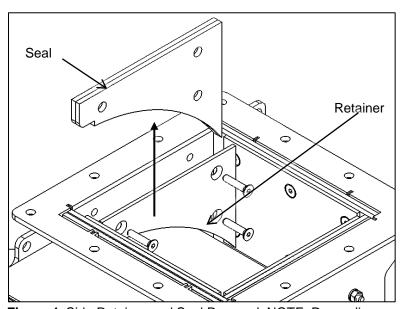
Side Retainer and Seal Removal. NOTE: Depending on the application, systems may use either a Single Seal or a Double Seal (Pictured). Retainer removal and seal replacement procedures are the same for each case.
